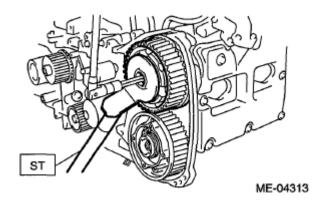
Removing Cam Sprocket Bolt Courtesy of SUBARU OF AMERICA, INC.
